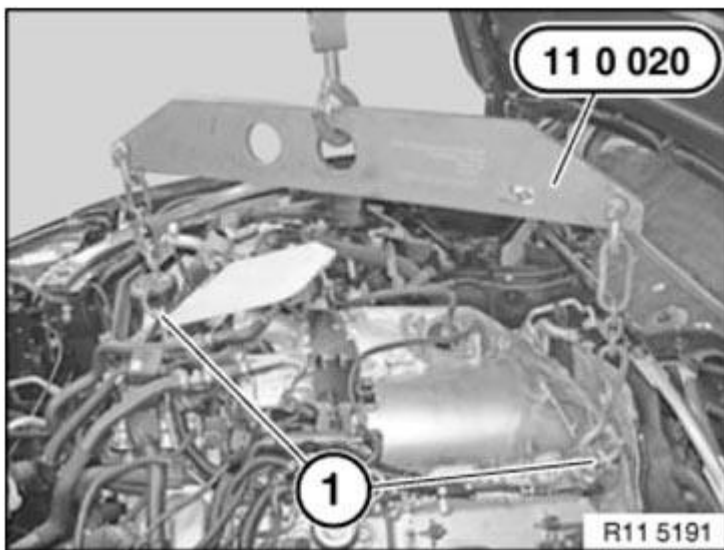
Lifting Out Engine With Special Tool (11 0 020)
